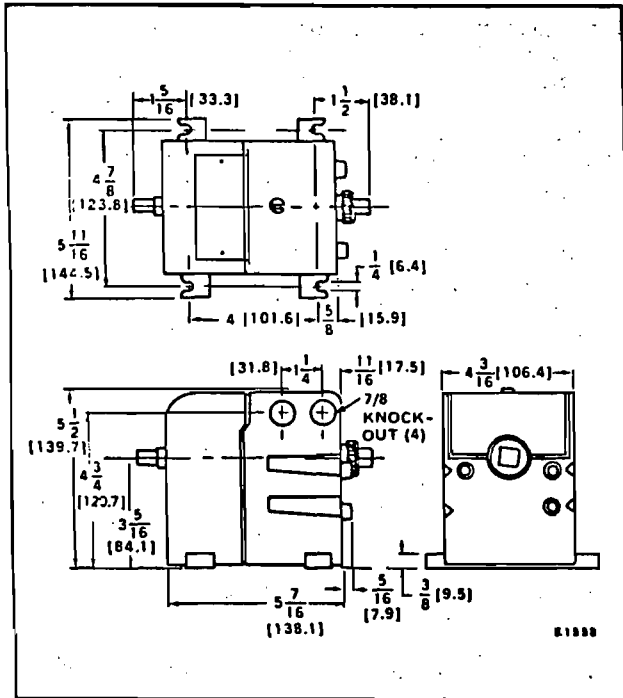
APPROXIMATE DIMENSIONS IN in. OF M934 MOTOR.
